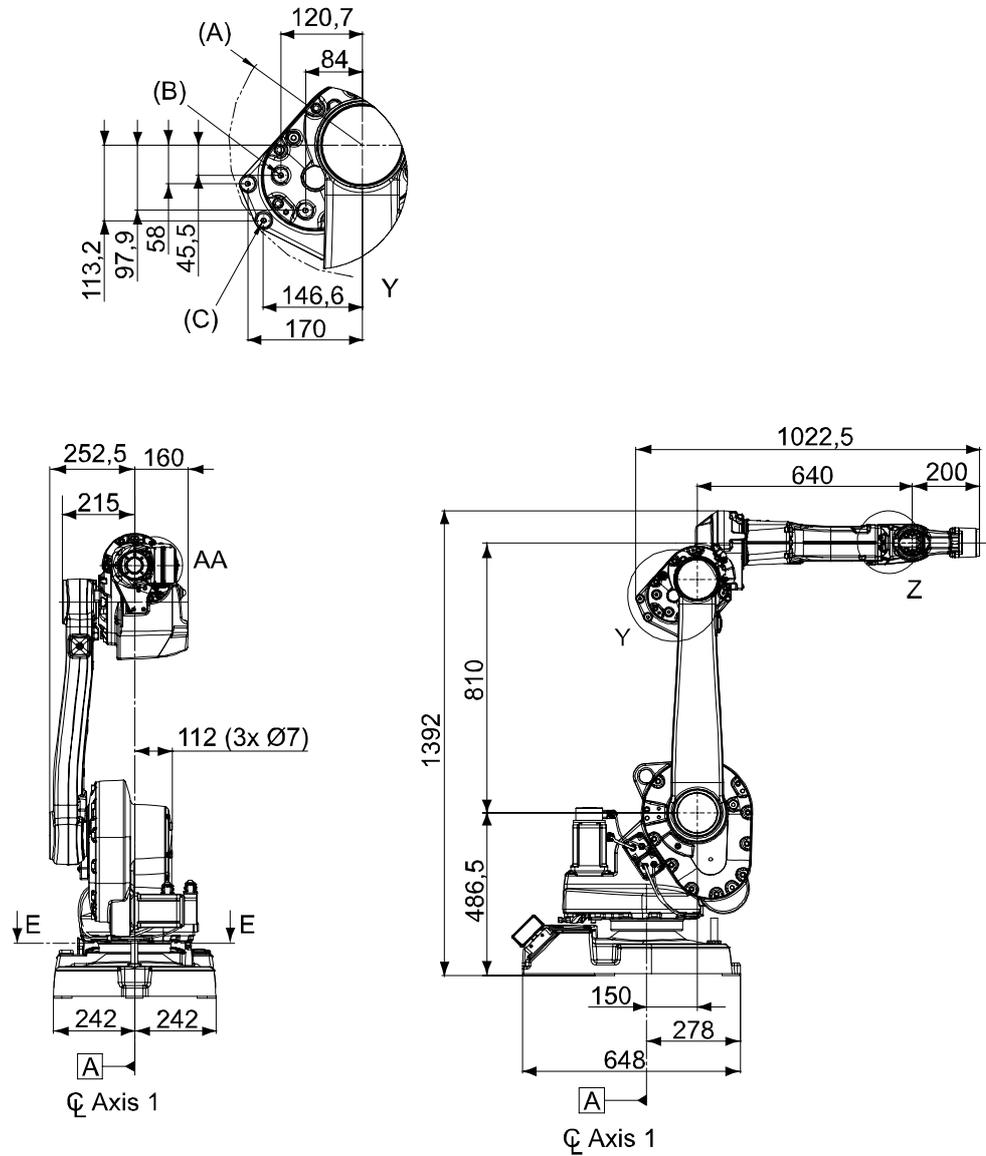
Holes for mounting extra equipment on the wrist, the upper arm housing and on the frame of IRB 1600ID-4/1.5.
